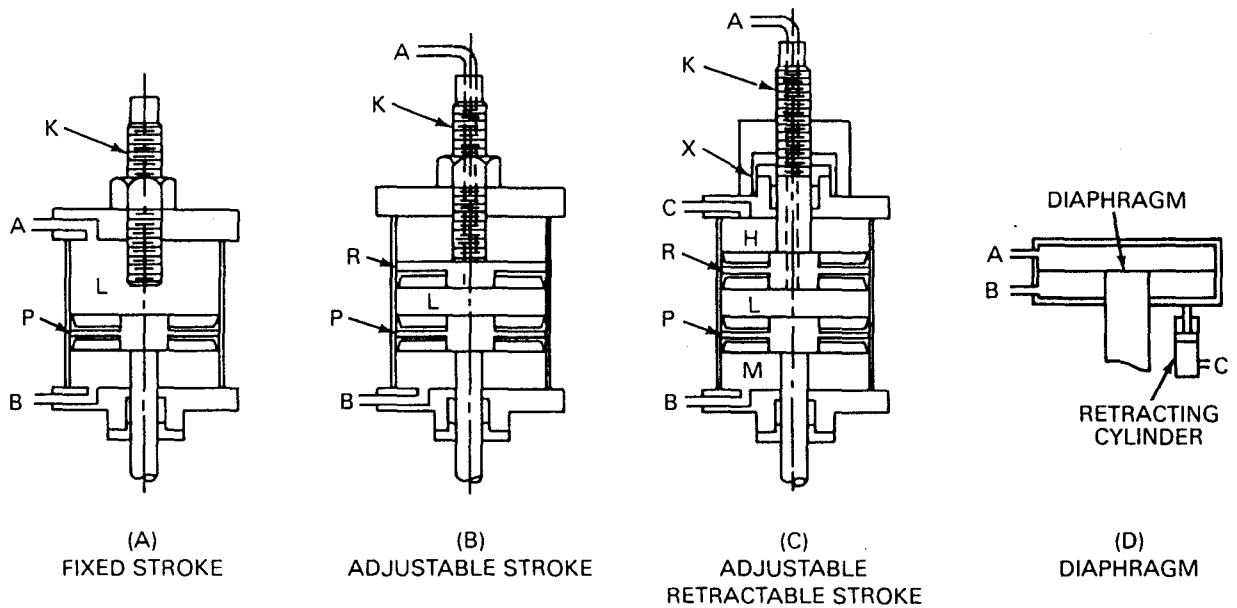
Typical Air Cylinder Designs for Air-Operated Press Type Welding Machines
